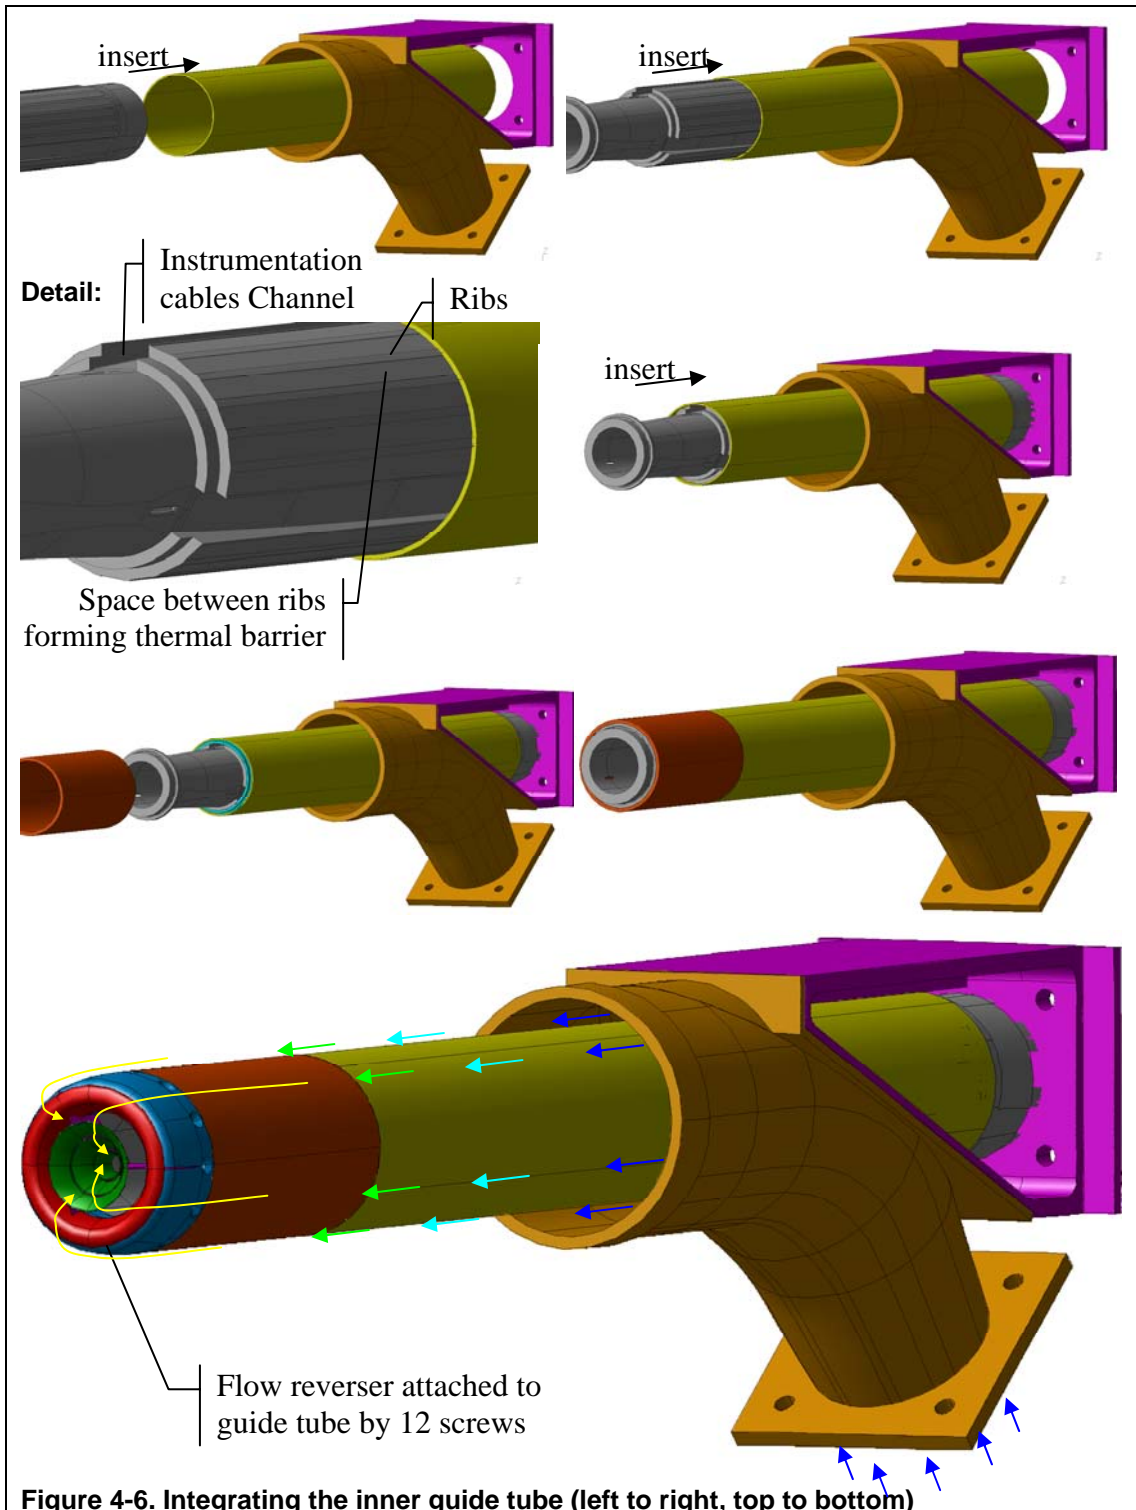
Integrating the inner guide tube (left to right, top to bottom)
